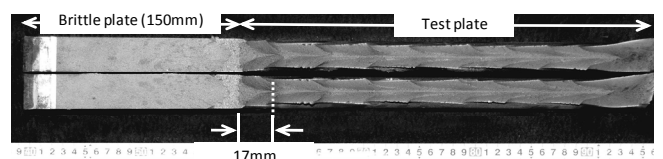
Fracture surface appearance of a duplex ESSO test specimen (Base metal, -165°C, 392MPa).
